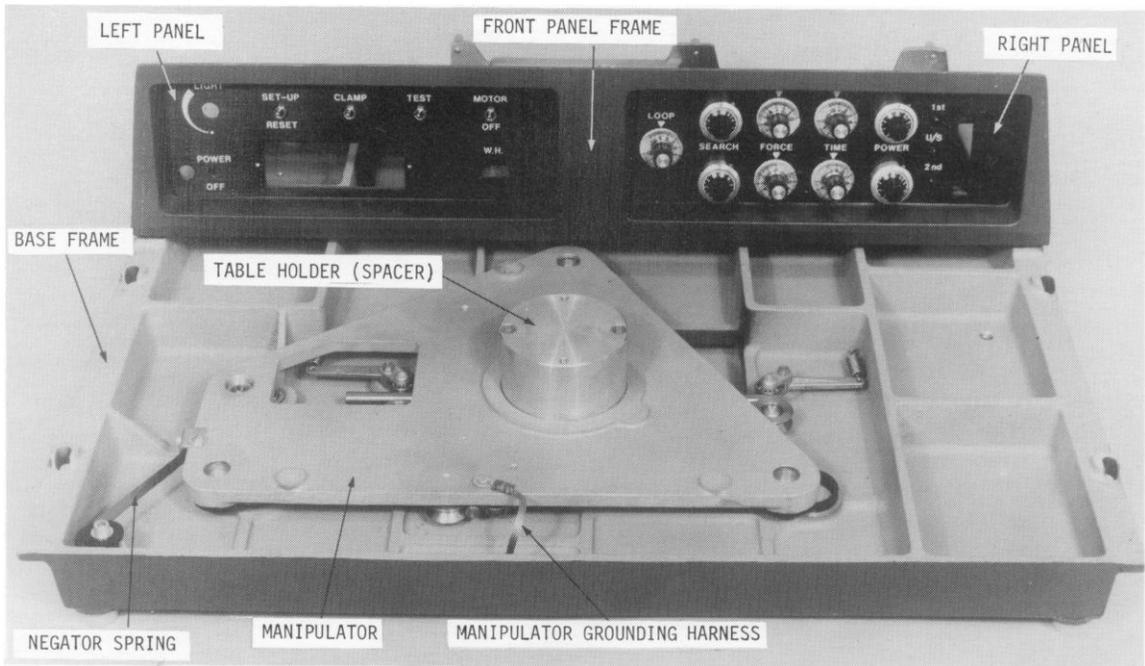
MANIPULATOR ASSEMBLY AND WORKHOLDER TABLE SUSPENSION
